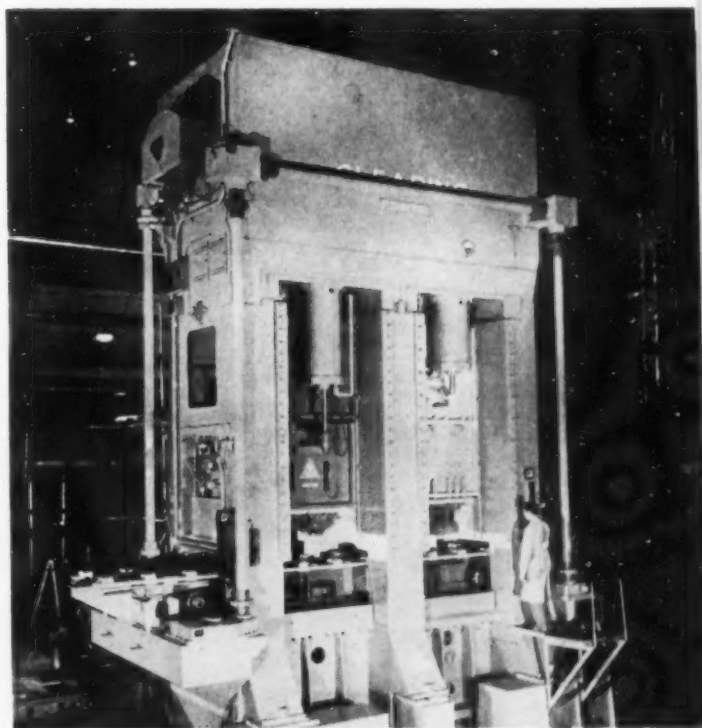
Transfer feed press has two slides and skip stroke on second slide so that identical half shells are produced except alternate shells have larger flanges to provide for welding halves together.
